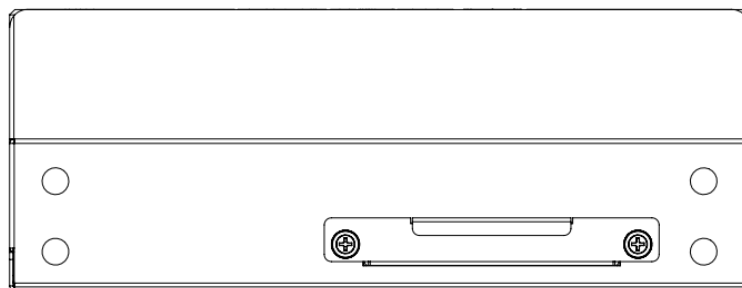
MXC-3300 mechanical dimensions (Rear view)
